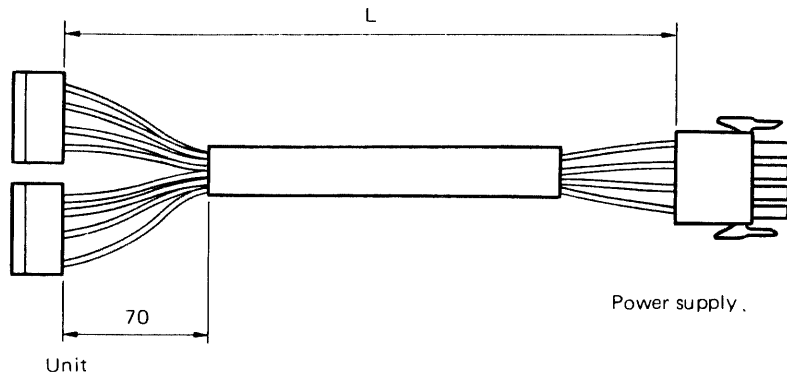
Power Cable (Specification: B660-0625-T327A)
